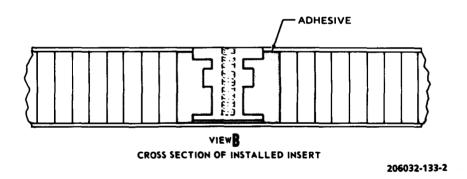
Honeycomb Panels - Installation of Inserts (Sheet 2)
